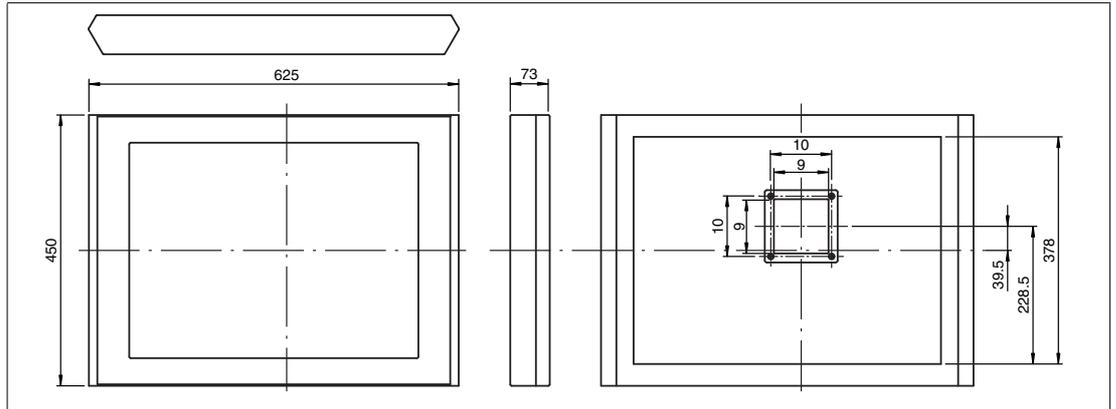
Dimensions VisuNet GMP PC/RM221 and PC/RM222
